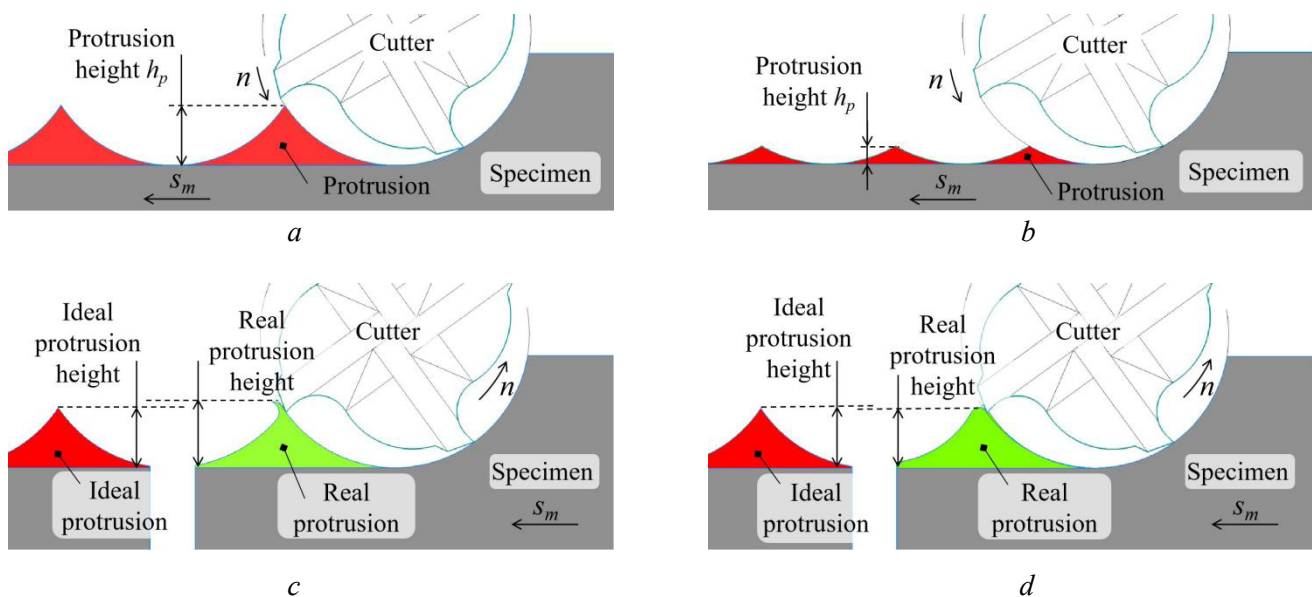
Profiles of the machined surface at low (*a*) and high (*b*) feed per minute  $s_m$  and machined surface during opposing milling of *WAAM*-deposited (*c*) and rolled (*d*) specimens
